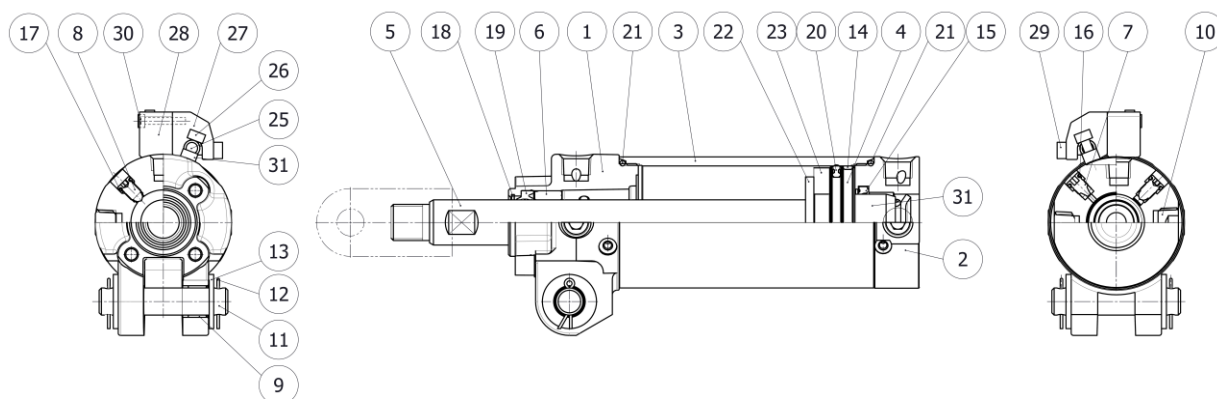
Construction of the built-in strong magnet clamp cylinder
